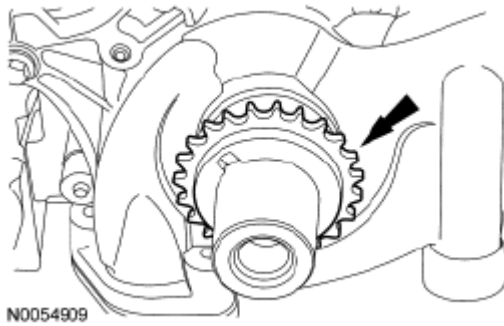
Locating Crankshaft Timing Chain Sprocket
